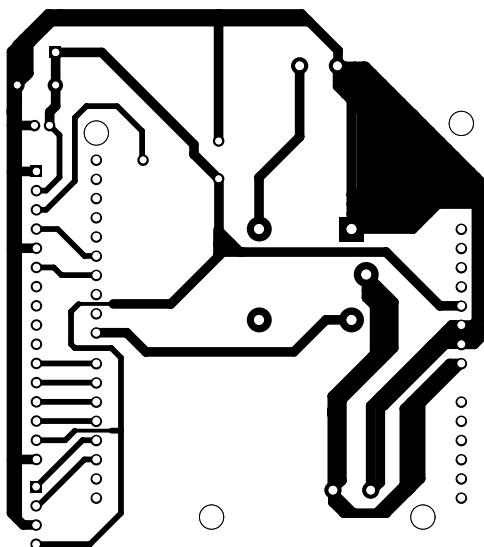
Actual-size PCB pattern of the fingerprint door unlock system
